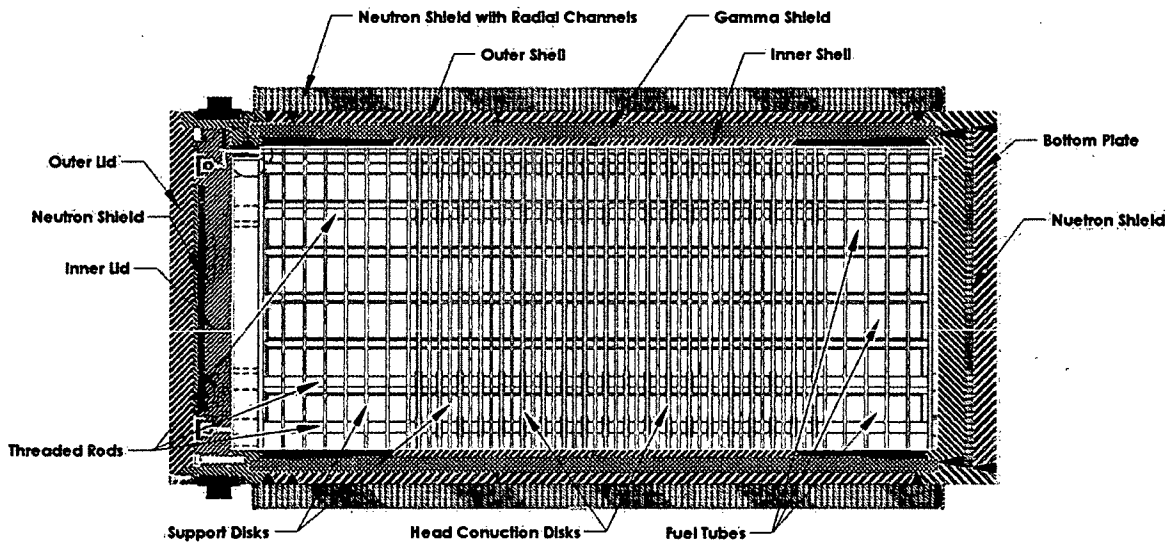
Cross-section view of the Rail-Lead cask with the directly loaded fuel basket.
